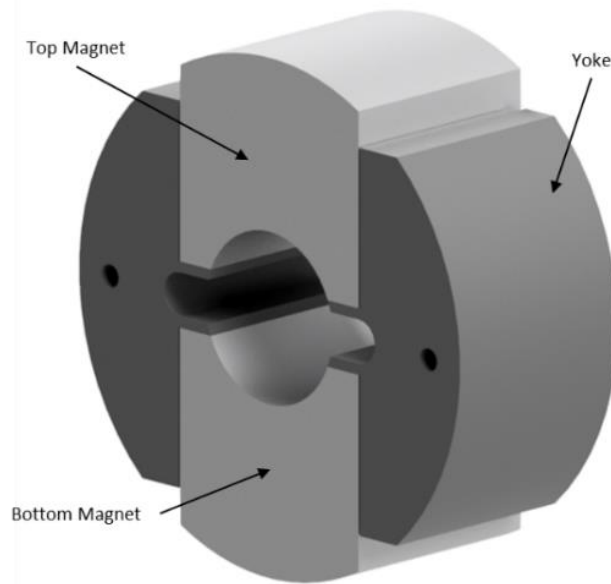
Model of the final flowmeter magnet assembly. The magnet vendor scope included manufacturing the magnets and fixturing them to the yoke. However, it did not include manufacturing the yoke itself.
